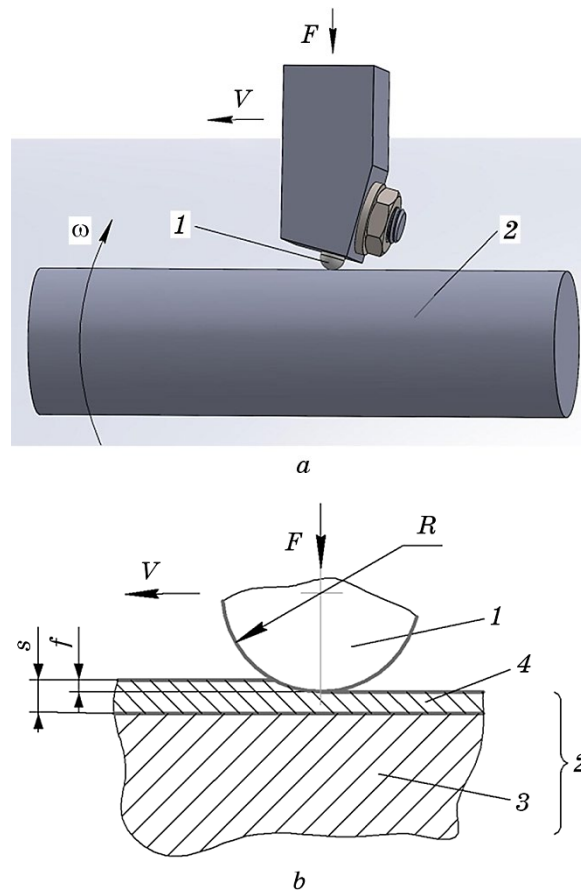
General view (*a*) and calculation scheme (*b*) of diamond burnishing of chromium coating: 1—diamond indenter; 2—cylindrical part; 3—the base of the part (steel); 4—chromium coating.
